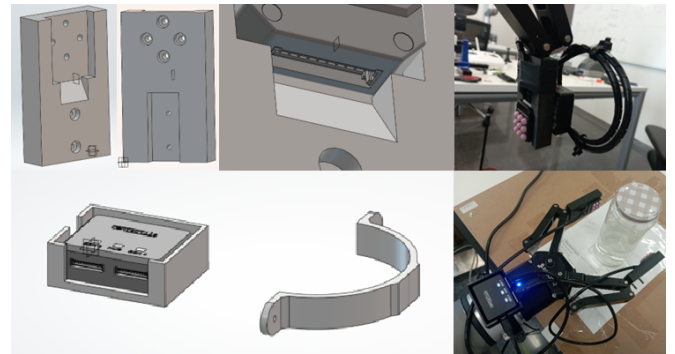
Design of case for Contactile sensor and mounting on 2F-140 ROBOTIQ gripper. (Top) Support to hold the sensor. (Bottom) Compartment and bracket to hold the controller. Link to download CAD files.
